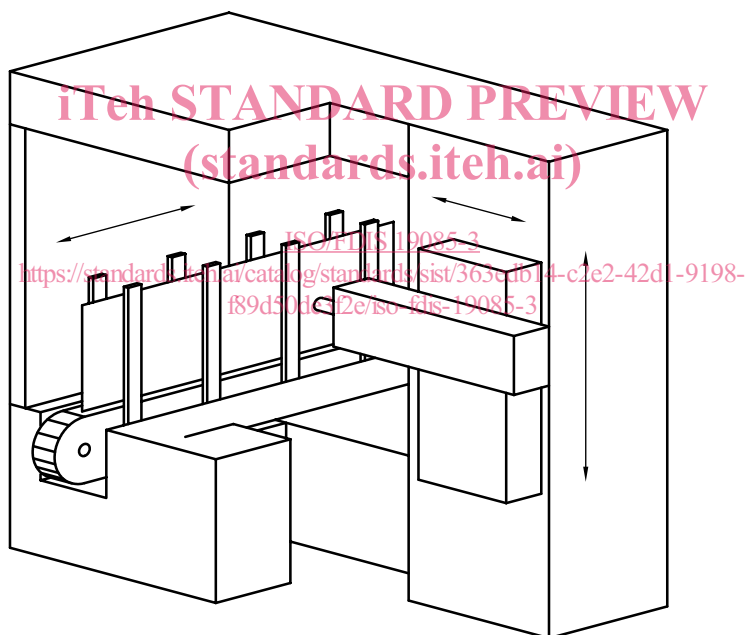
Example of a through-feed vertical machine with moving workpiece, fixed frame, moving machining head
